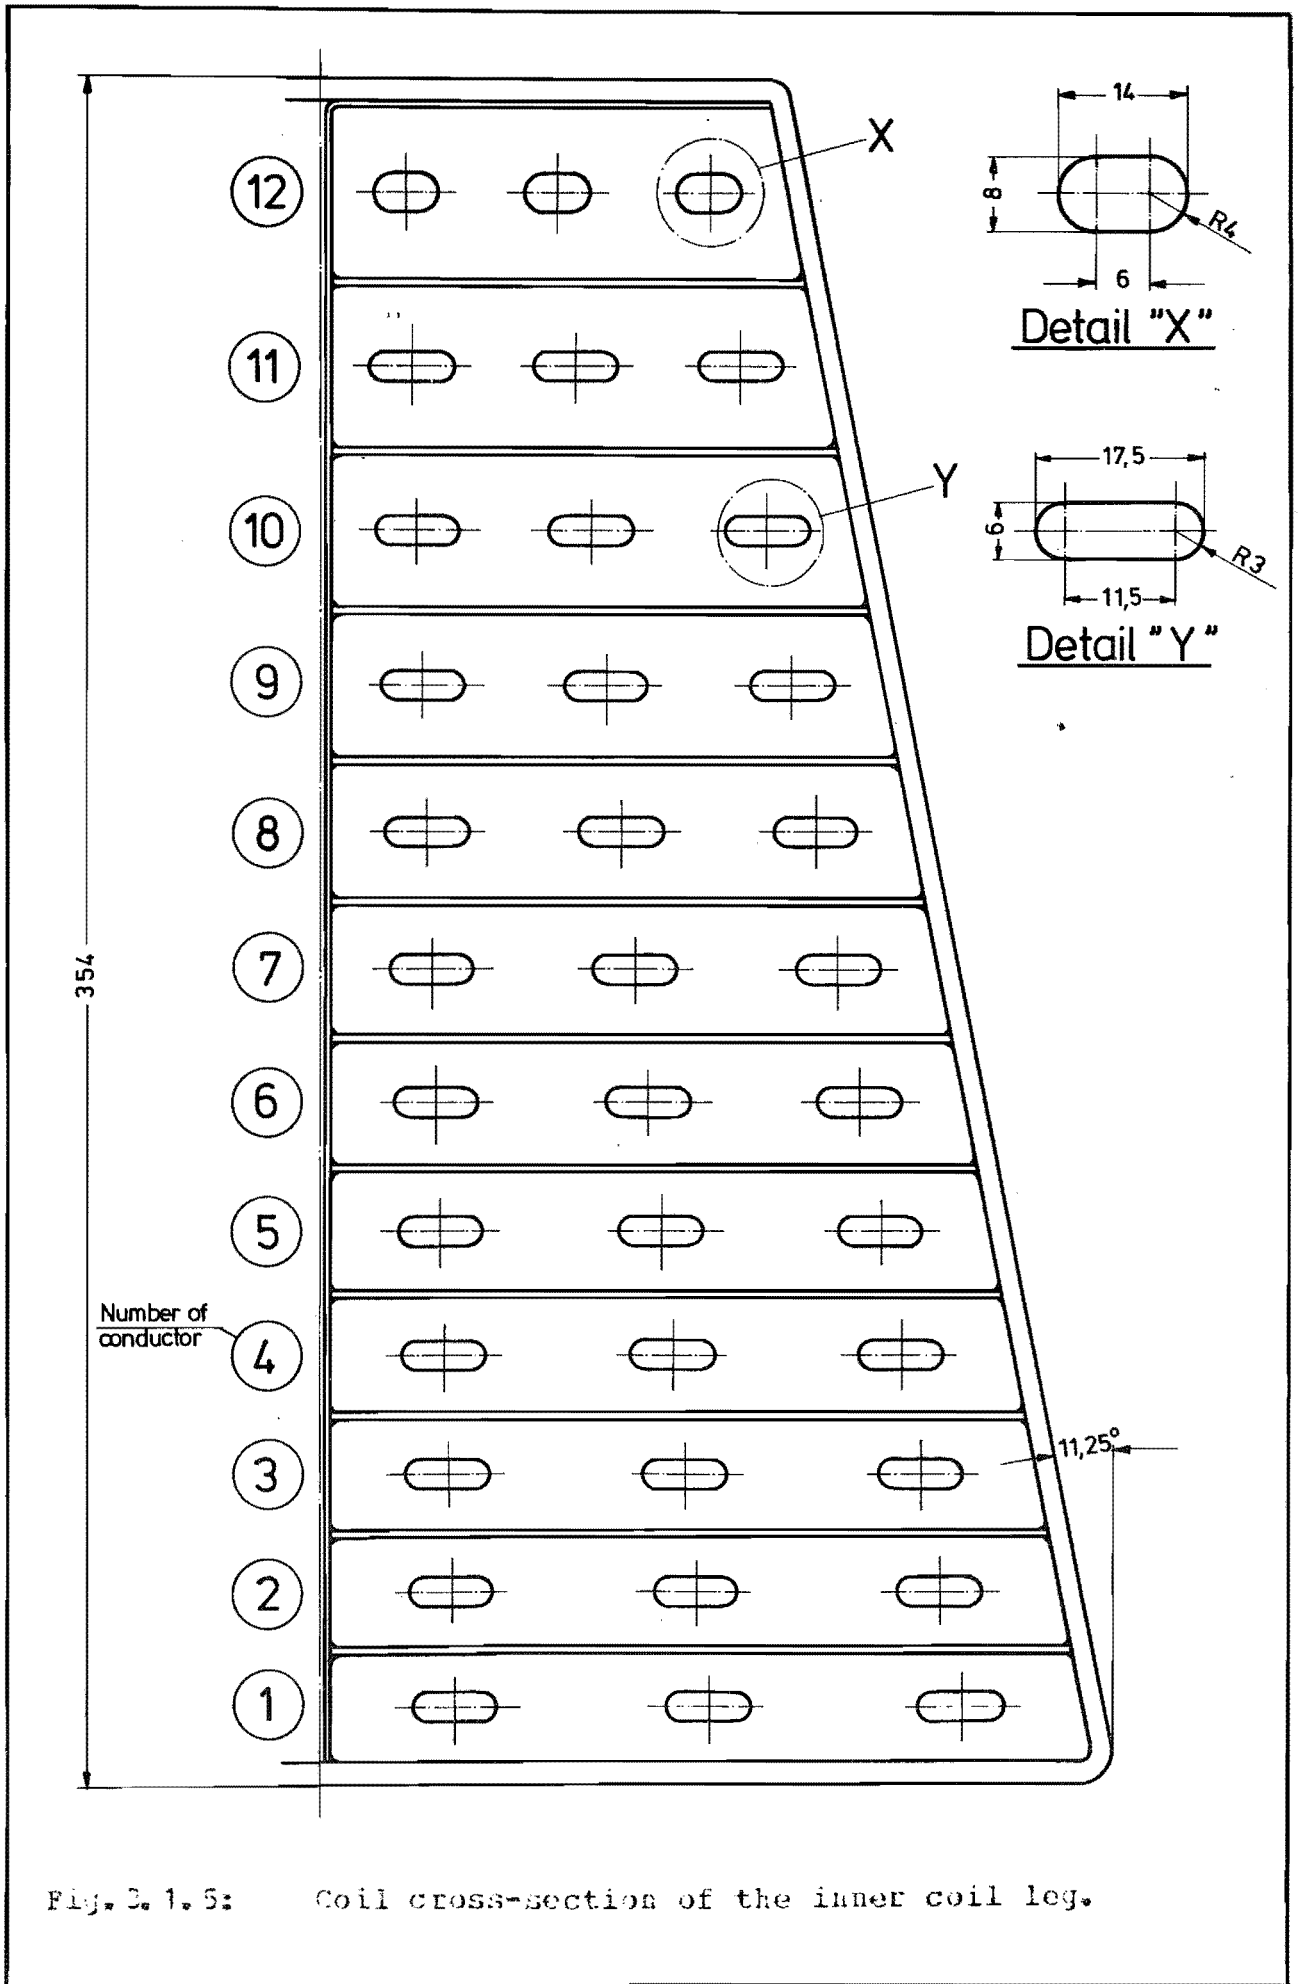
Coil cross-section of the inner coil leg.
